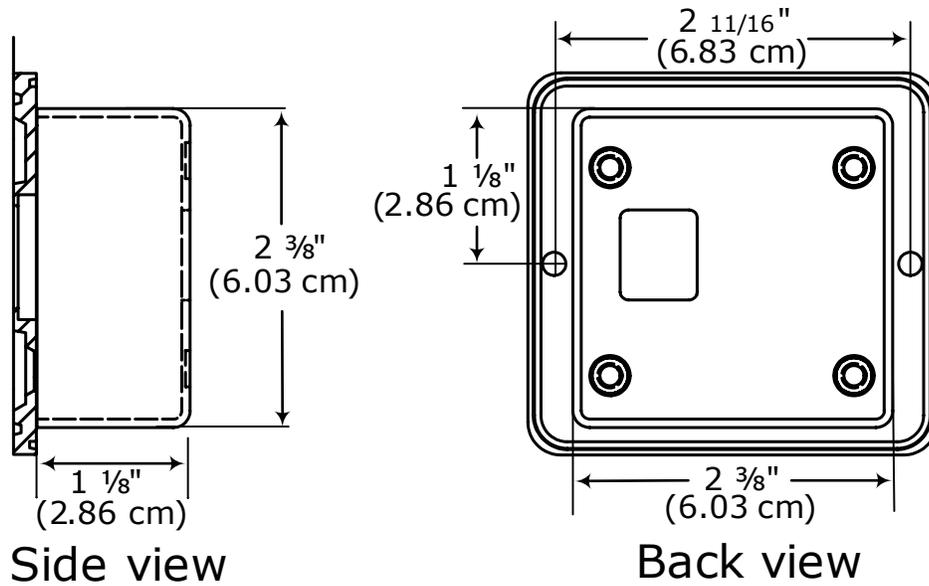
, Cut-Out Dimensions for a Flush Mounted Remote
